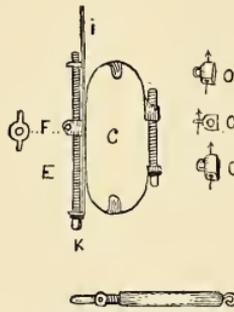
Parts of Fig. 210 shown in detail (A).
